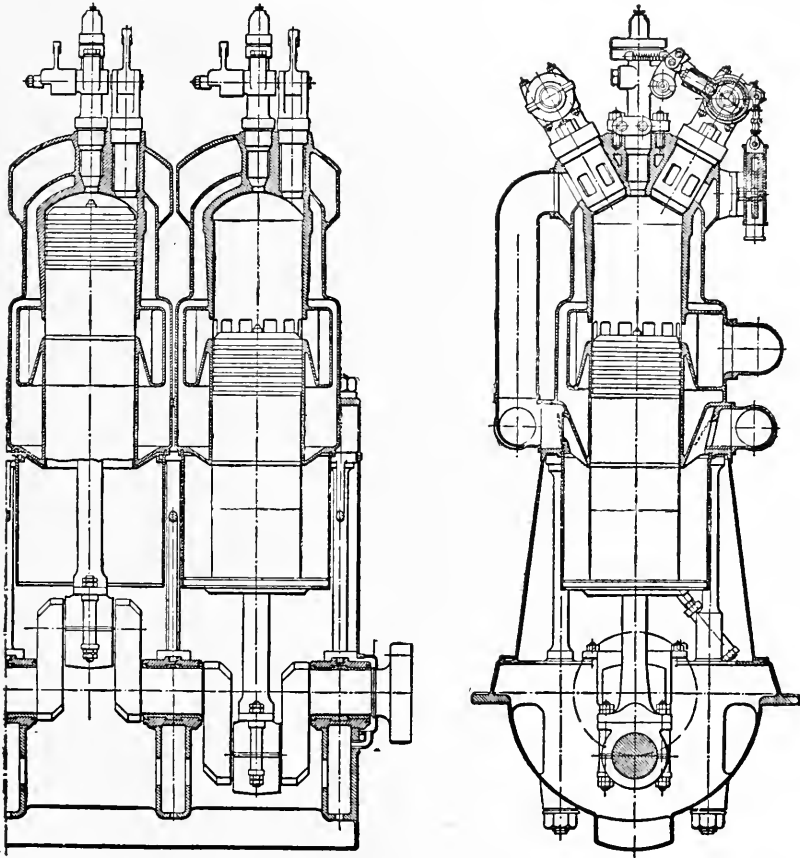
Two-cycle Single-acting Marine Engine for Heavy Oil—Diesel System.
